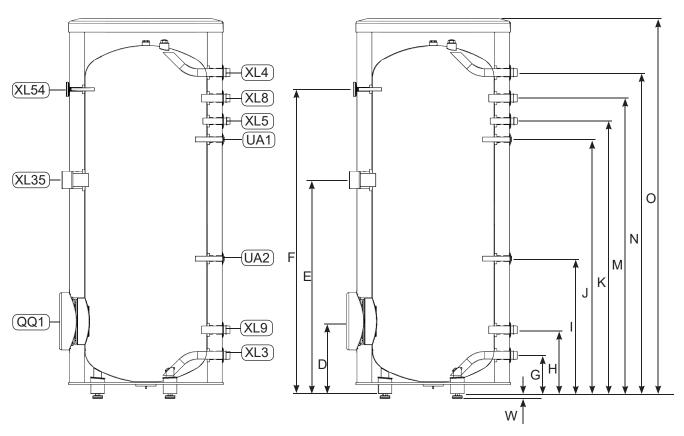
Dimensions of the BA-ST 9022-9050-FE storage tanks.
